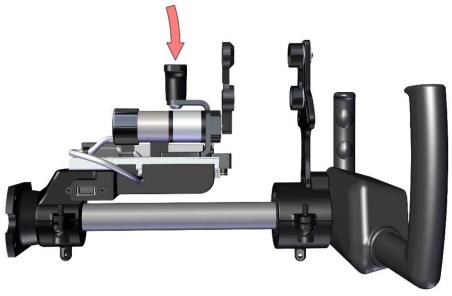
Pivot the Actuator Assembly down and snap into place. Beware the YC Assembly will want to snap together to the Actuator Assembly at this point.
